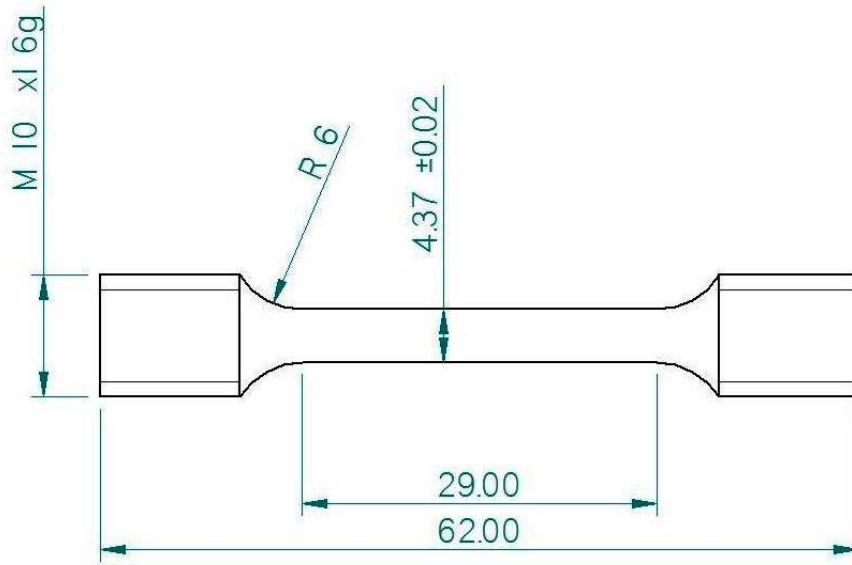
Tensile specimens with dimensions in mm machined from brake callipers.
